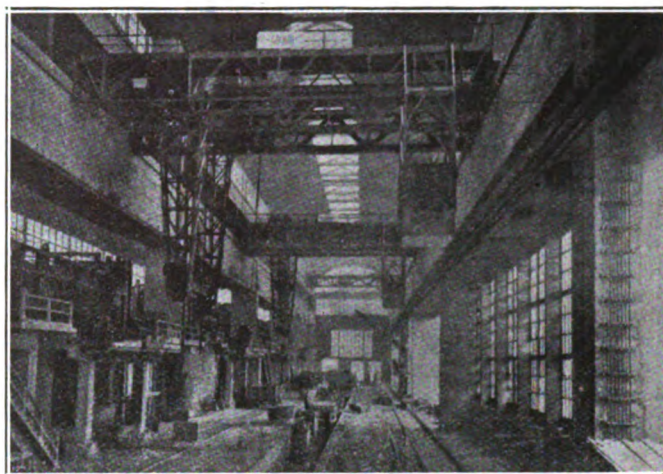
View of 60-ton ladle cranes over the casting pits.
